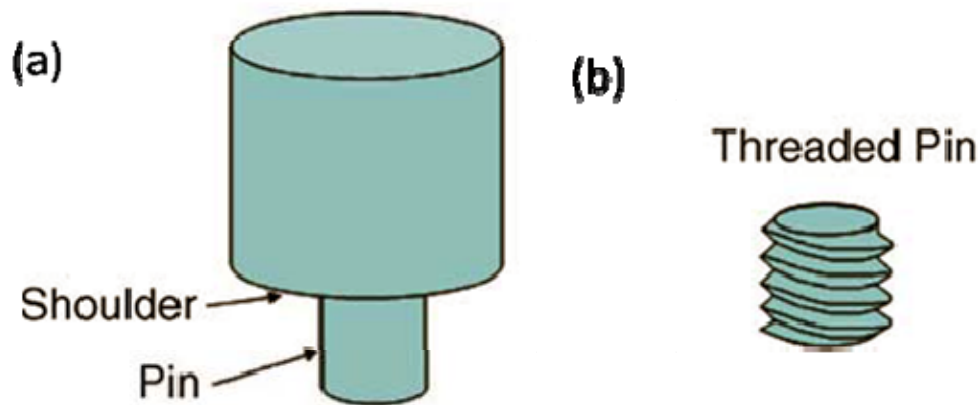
Simplified Tool Design (a) Schematic of Shoulder and Pin (b) Threaded Pin Only. From [22]
